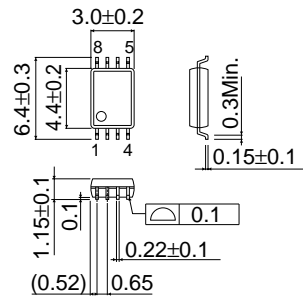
(d) PHYSICAL DIMENSION (Units : mm)
